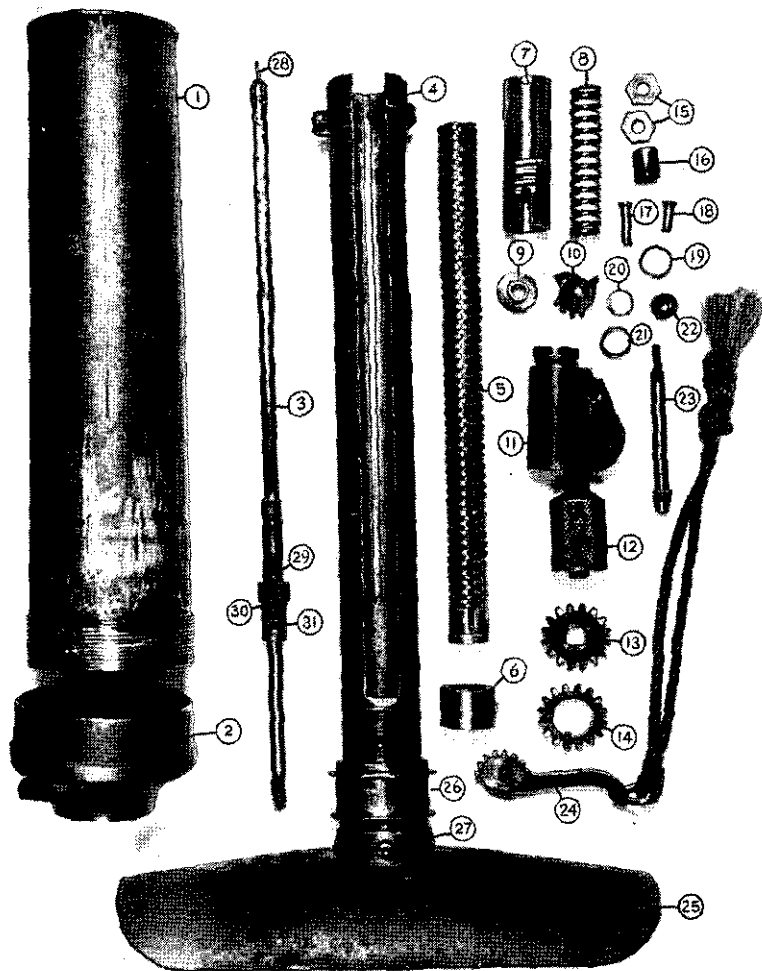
Disassembled parts of Model 89 (1929) 50-mm grenade discharger.
